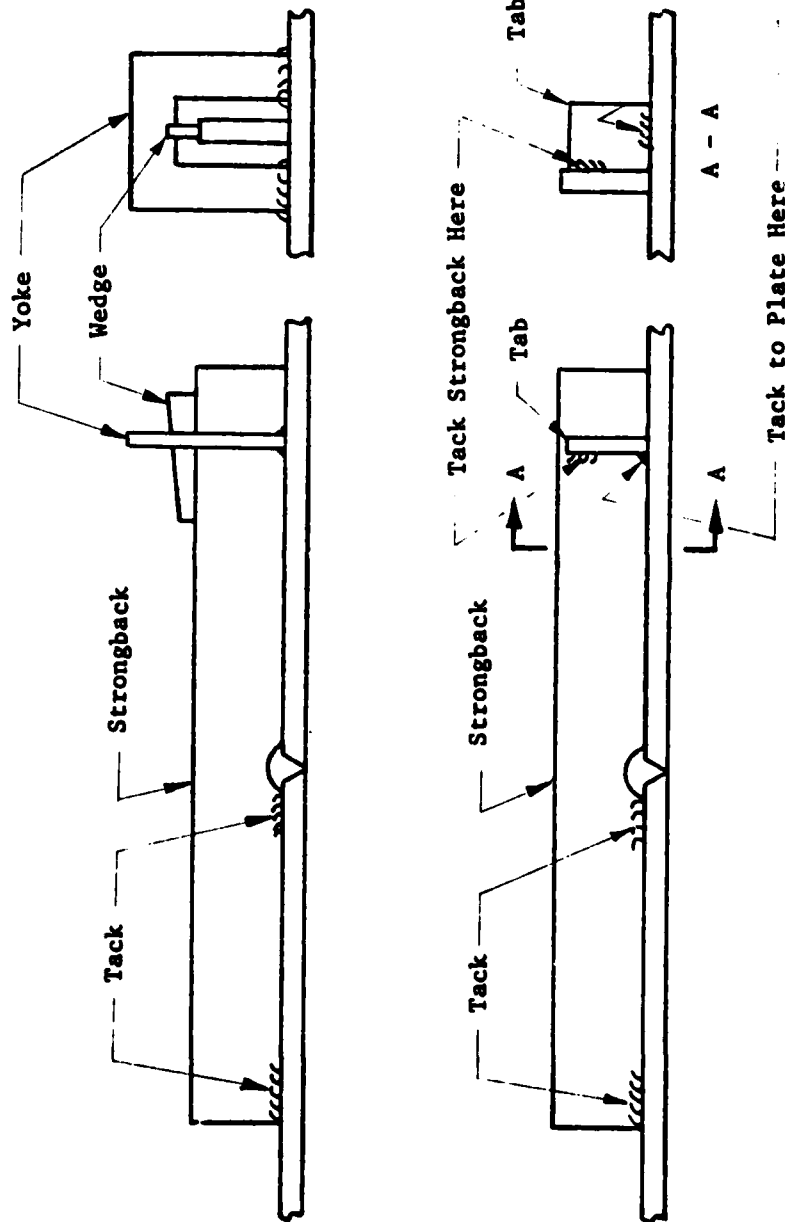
Typical Plate Alignment Aids (Sheet 3 of 3).
